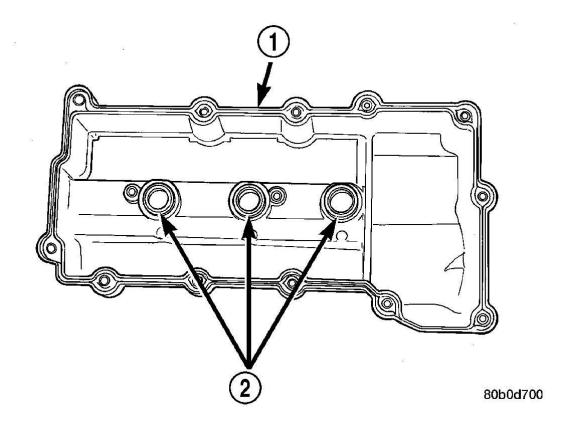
View Of Cylinder Head Cover Gasket & Spark Plug Seals Courtesy of CHRYSLER LLC
